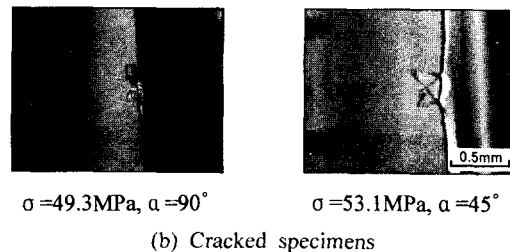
Fracture patterns after ball-on-ring bend test in 3mm thick glass specimens
